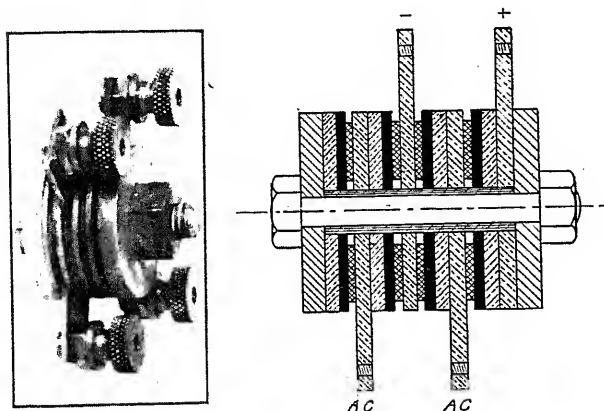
ASSEMBLY OF FULL WAVE RECTIFIER
